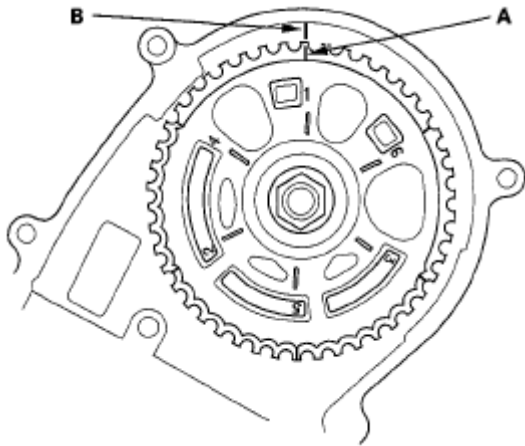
Aligning TDC Marks On Camshaft Pulleys With Pointers On Back Covers - Front
